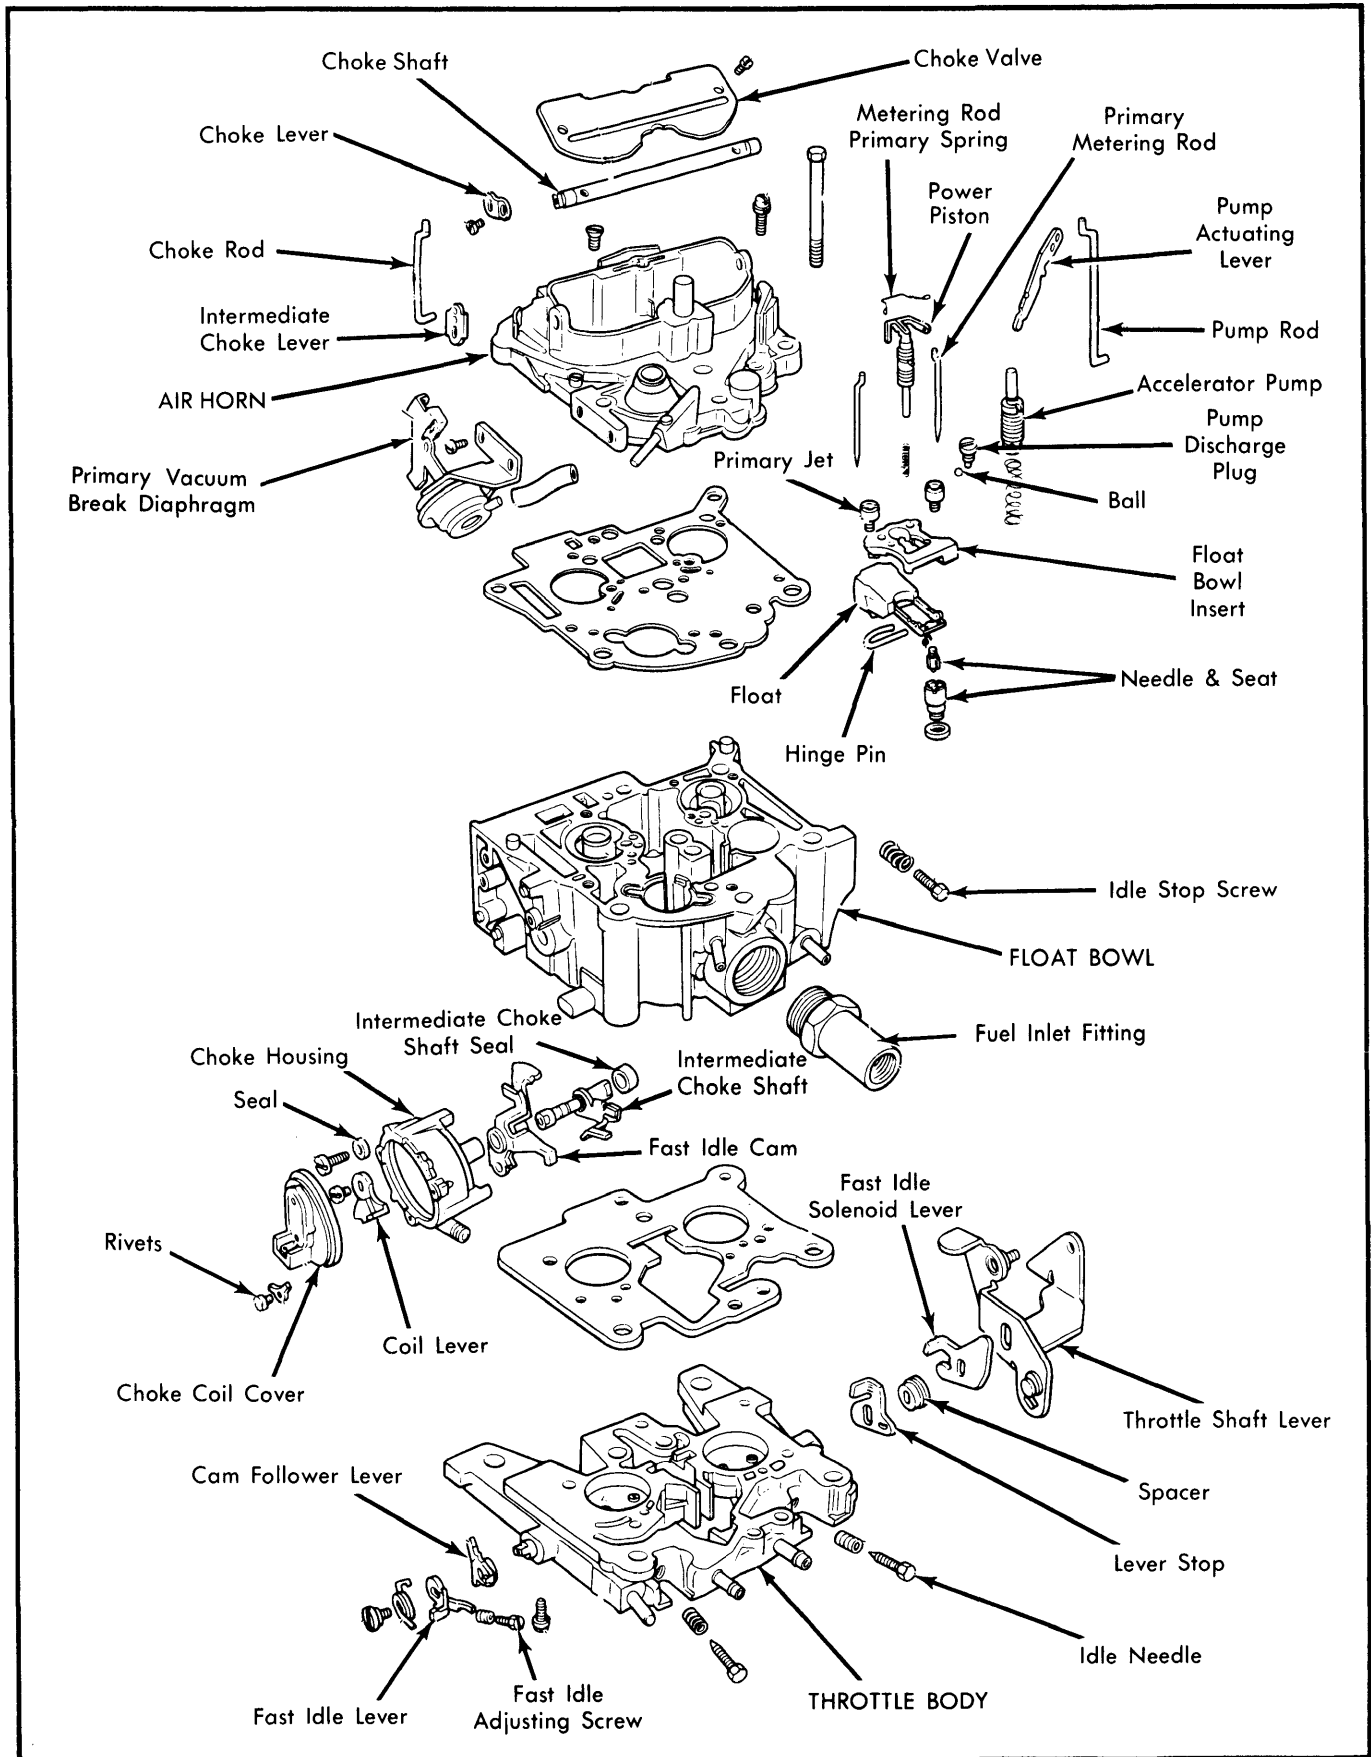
Exploded View of Rochester Model M2ME Carburetor
